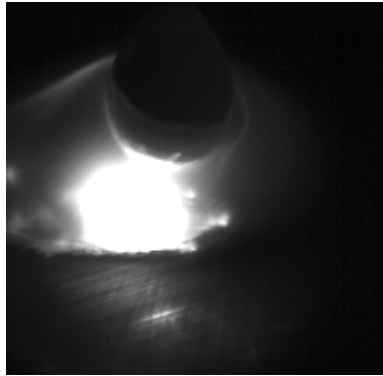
High-speed photograph snapshot of MIG welding; 1000 fps; bead on plate; EN AW-6060 (AlMgSi0.5) T66; filler Al4047 A (SG-AlSi12); $\varnothing_f = 1 \text{ mm}$; torch distance $s = 22 \text{ mm}$; torch tilting angle $\alpha = 20^\circ$; argon flow 15 L min^{-1} ; $v_w = 0.75 \text{ m min}^{-1}$; $v_f = 5.5 \text{ m min}^{-1}$; $I_{abs} = 95\%$; $I_s = 80 \text{ A}$
